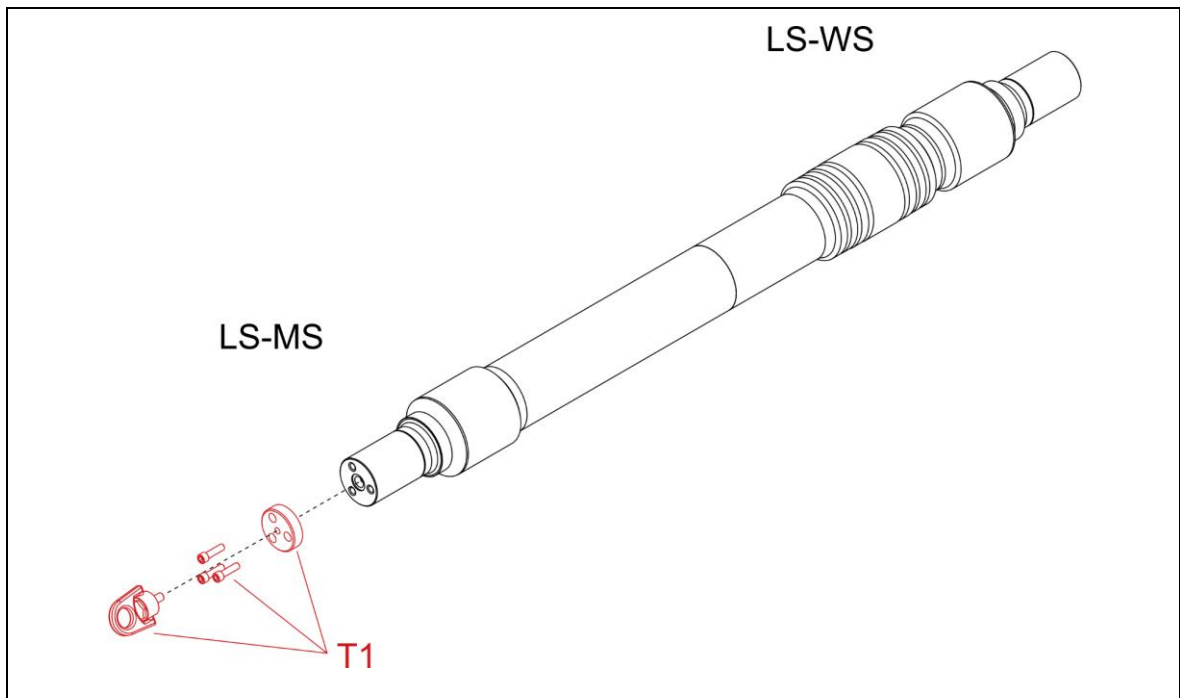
Installing shaft lifting device (part of T1) to the wheelset shaft
